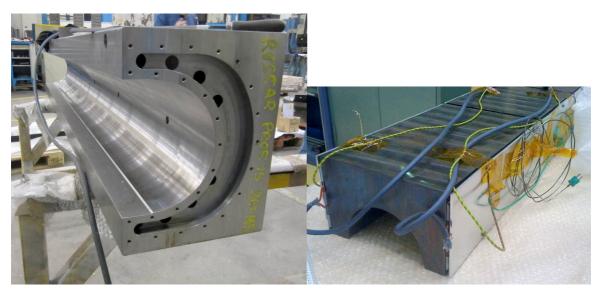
Left: Curing mould with channels for the oil heating. Right: Mould with heating plates
